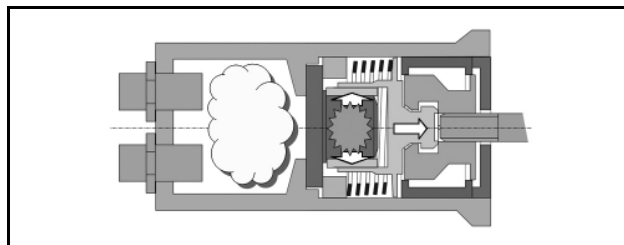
Step 3: Displacement of the piston, then of the piston + threaded segments.
